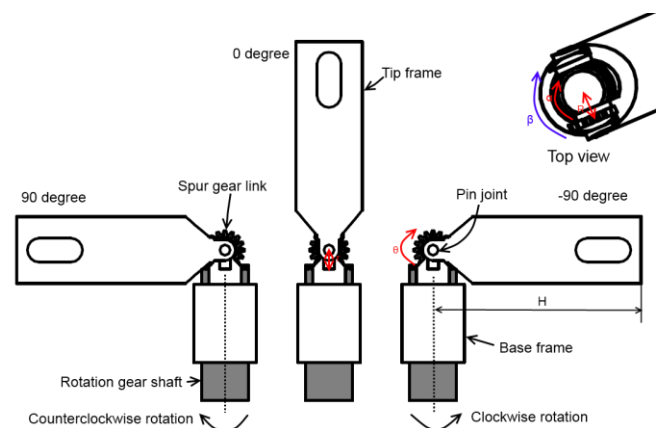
Bending mechanism, transforming rotational motion of the gear shaft to a rotation of the frame, enabling ± 90 degrees bending motion.
